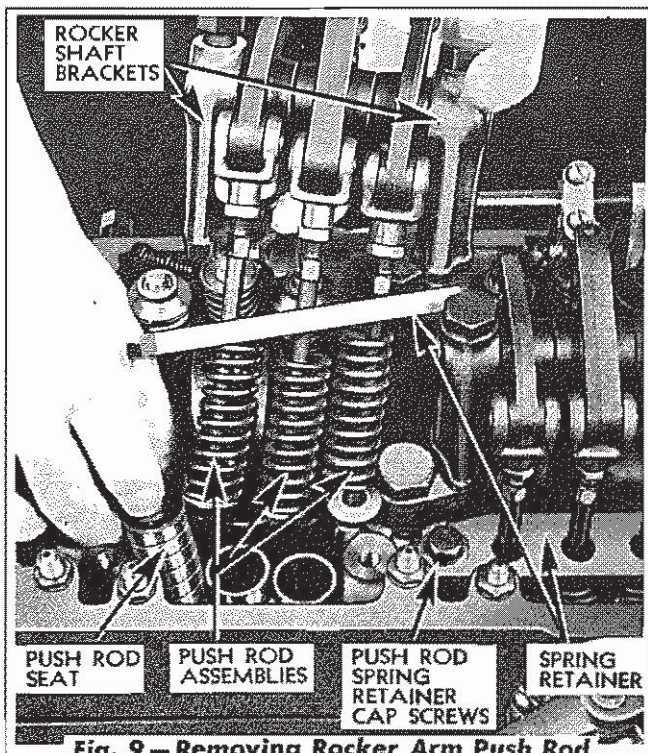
Removing Rocker Arm Push Rod Assemblies And Push Rod Seats
